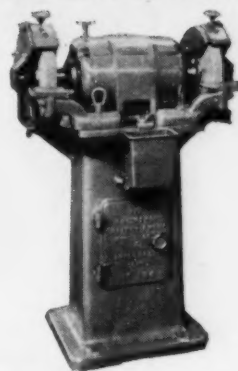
Original construction of pedestal grinder required costly milling and drilling using heavy machine tool equipment. Casting had to be filled and painted to obtain quality finish for sales appeal.
